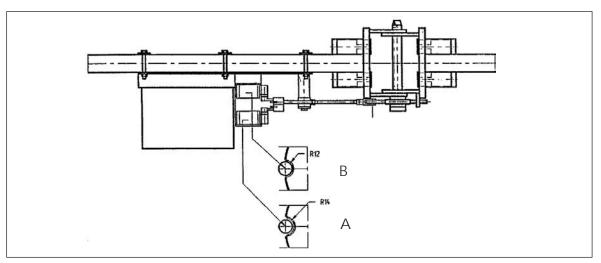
Assembly of the hingehalves to middle the platform.
